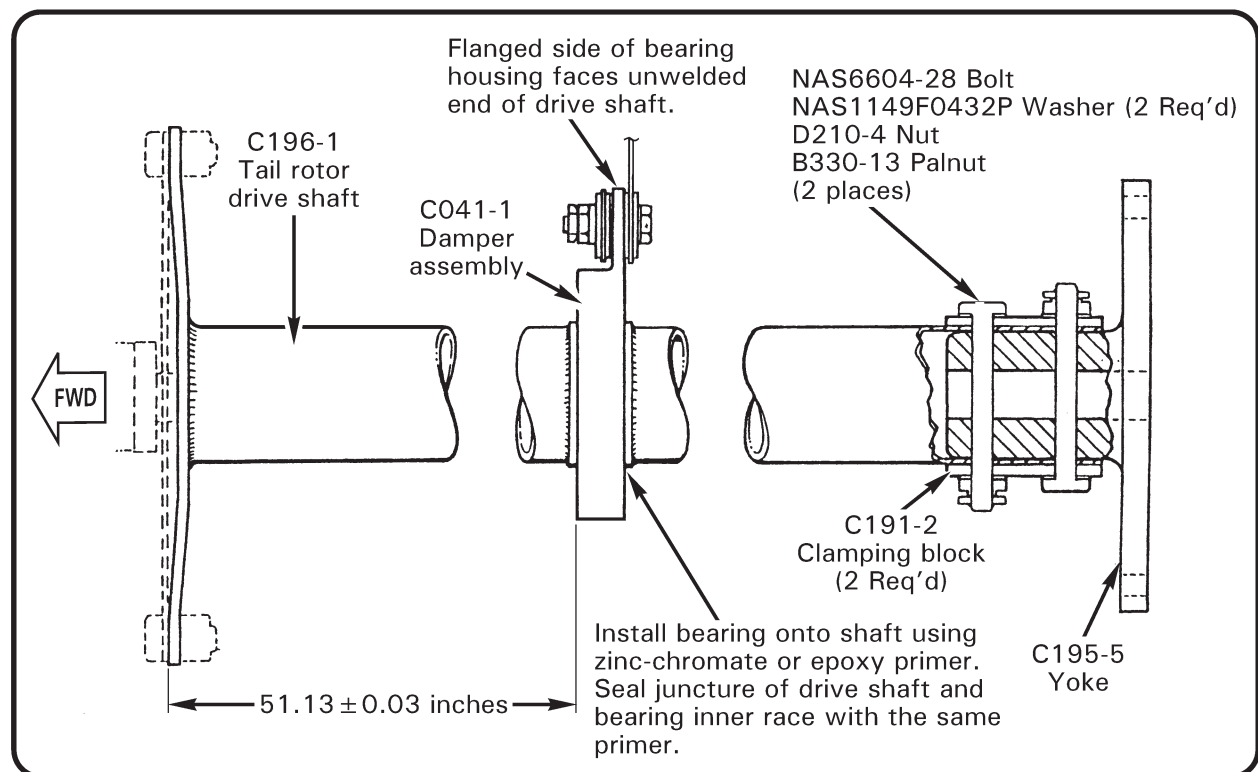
B C196-1 TAIL ROTOR DRIVE SHAFT
